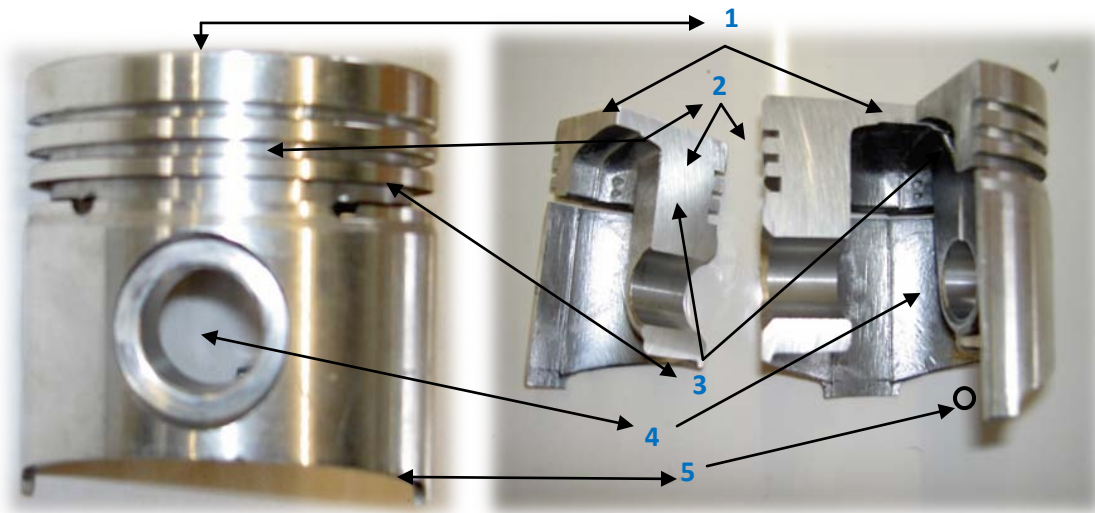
Engine piston parts: 1. piston head, 2. piston rings grooves, 3. lands 4. piston pin, 5. skirt, [4].
